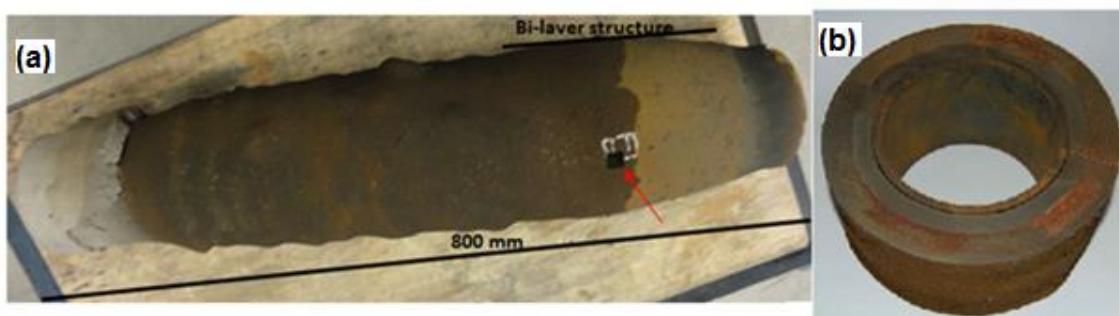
(a) Spray-formed SM-13Cr-1B/SMSS bimetallic pipe produced in the SF1 run. (b) Transversal section of the bimetallic section.
